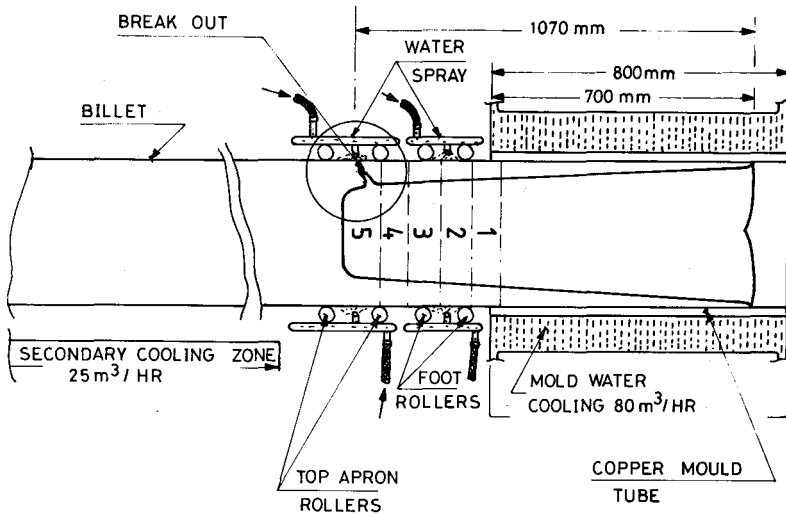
Schematic showing details of primary cooling zone and location of break out
